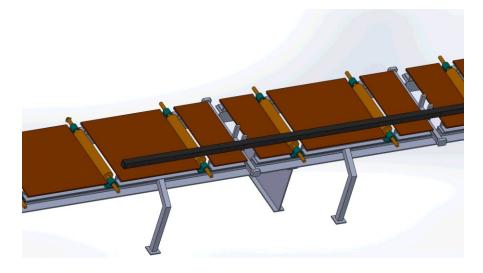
Working of Rodless Cylinders in Pushing Finish Product
